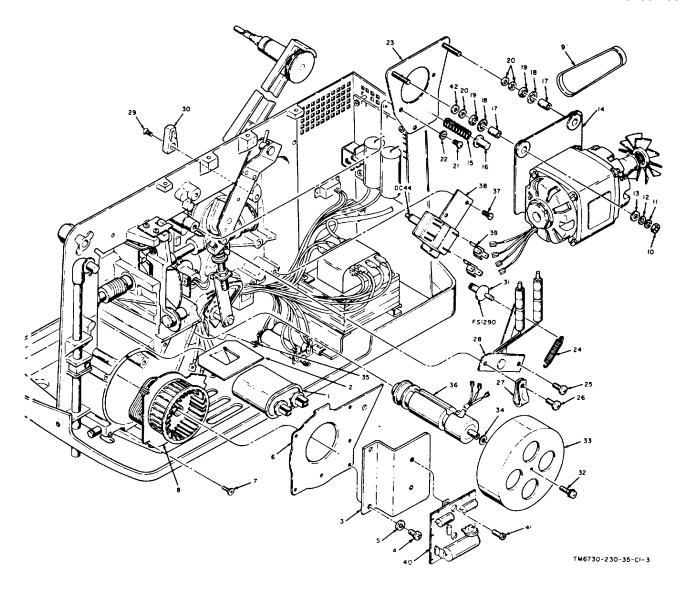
Main drive system, sound drum, and cooling system components exploded view (AQ-9A).
